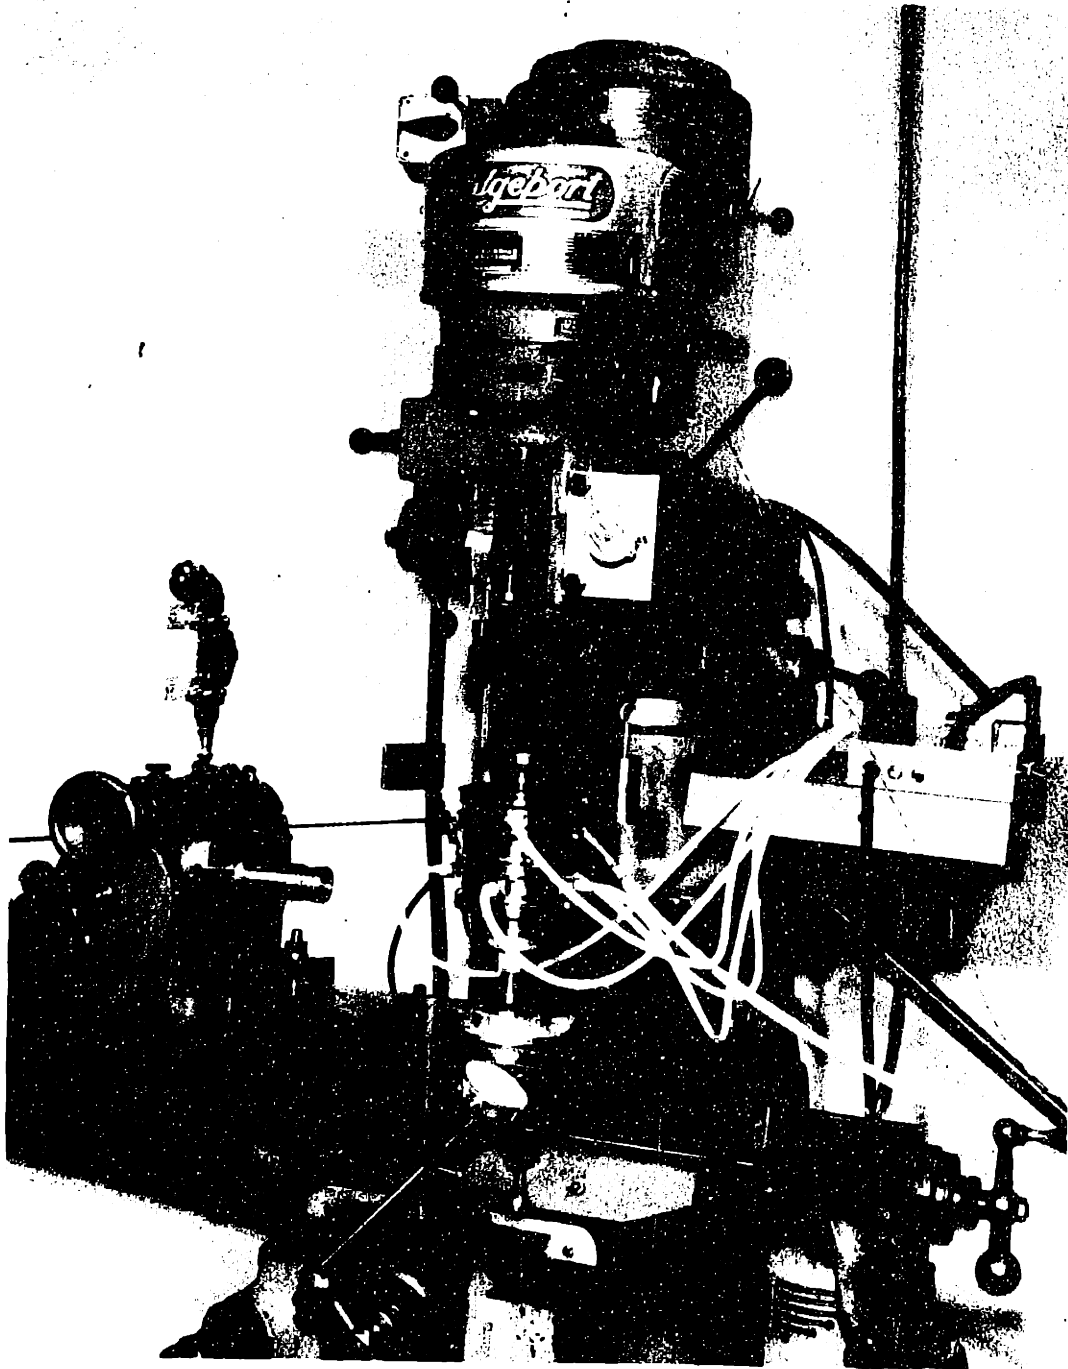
Overall view of the milling machine setup with the second compliance system mounted in the milling machine spindle.
